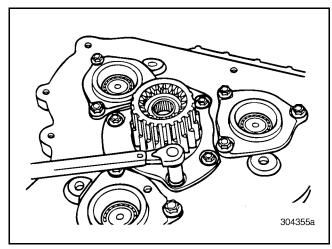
Tightening Compound Main Drive Gear Retaining Plate Capscrews
